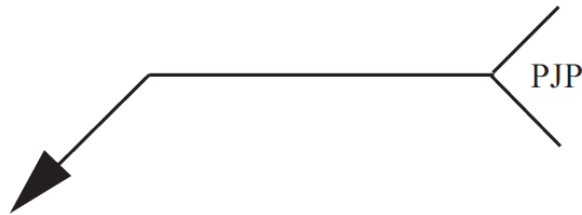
Minimum Effective Weld Size PJP Welding Symbol
